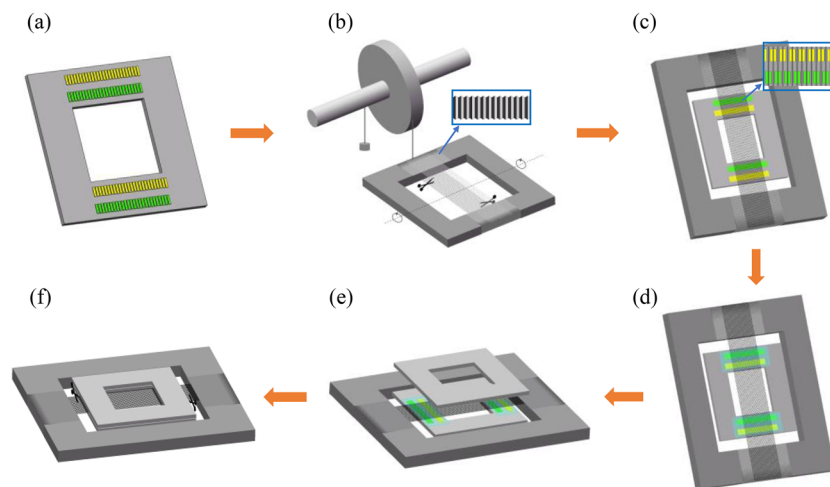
Production of the BNG mass gate: (a) PCB board with contact pads; (b) wires wound around the 3D printed winding tool with evenly distributed grooves (with distances of 400 μm in this work); (c) alignment of the wires to the contact pads on the PCB; (d) wires are glued to the pads with silver paste; (e) wires are coated with a thin layer of Torr Seal and quickly covered with a ceramic plate; and (f) wires are cut, and the winding tool is removed (more detailed descriptions are presented in the supplementary material).
